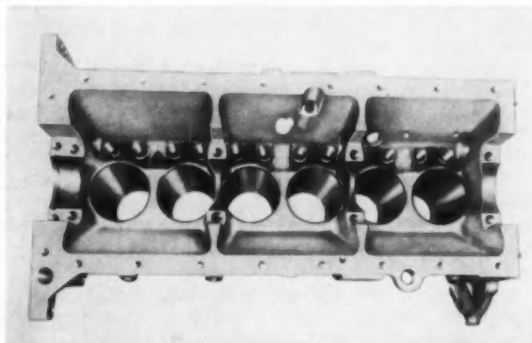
Bottom view of Chrysler die-cast aluminum cylinder block.
